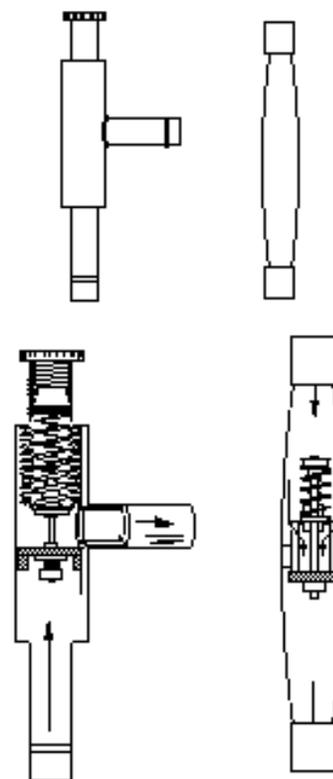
Adjustable Flooding Valve and Differential Check Valve
